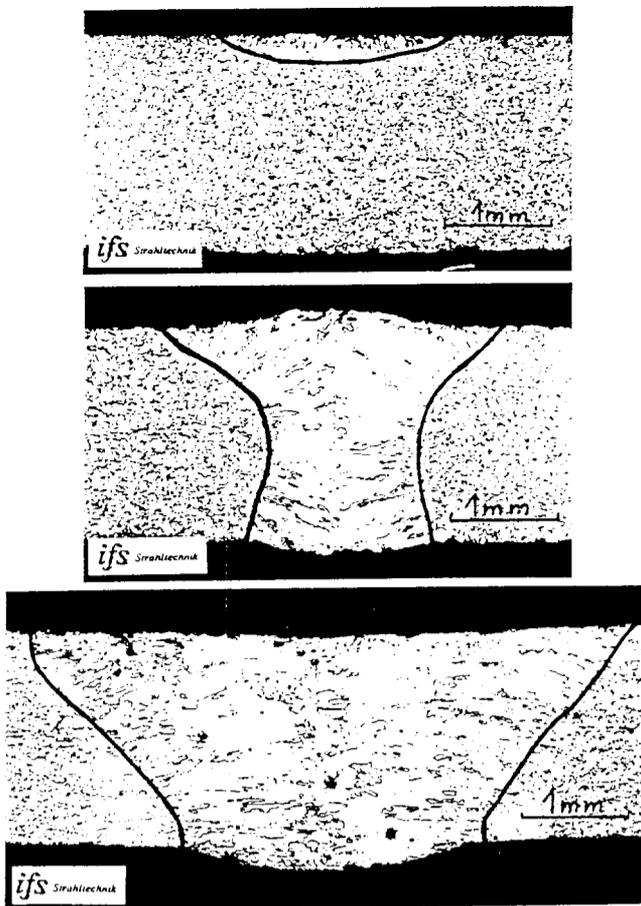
Cross sections of a typical Laser-TIG weld and a TIG weld (Parameters as in table 1; top: conv. TIG at 650 mm/min, center: Laser-TIG at 650 mm/min, bottom: TIG at 380 mm/min)
